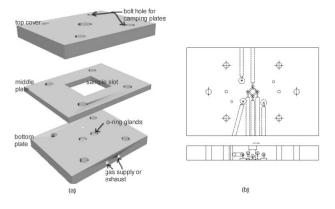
(a) Micro turbine/bearing packing concept illustration, the top and bottom plates are made of PMMA. (b) Layout of top packaging plate.
